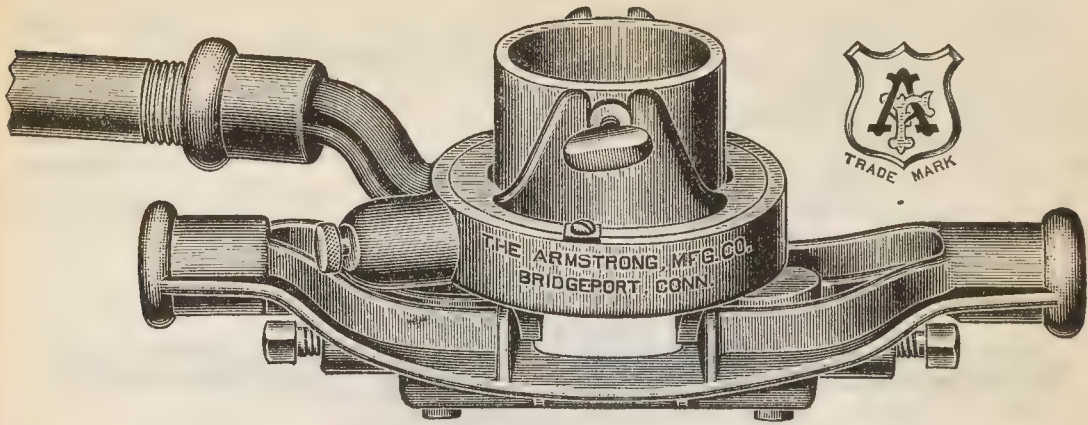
,236.—Armstrong ratchet attachment for stock. Can be used for either right or left hand threads by reversing pawl without removing from stock. To ratchet the die off the pipe, make one or two turns back, when the pawl can be disengaged by lifting and making one quarter turn of pawl; then turn the stock and ratchet remains idle.
